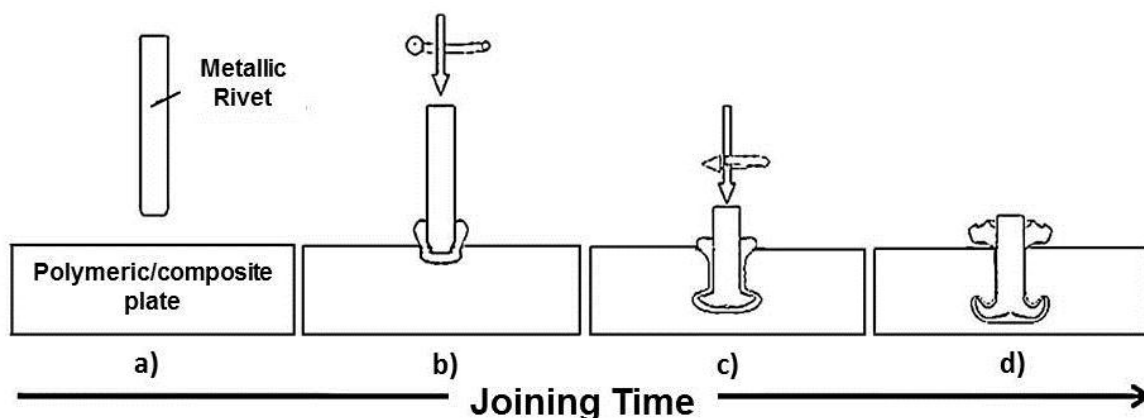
3 Schematic of the Friction Riveting process for metallic-insert joints in thermoplastics. a) Positioning of the joining parts; b) insertion of the rivet into the polymer during the frictional phase; c) deceleration and rivet forging and d) consolidation of the joint (Adapted from [42]).
